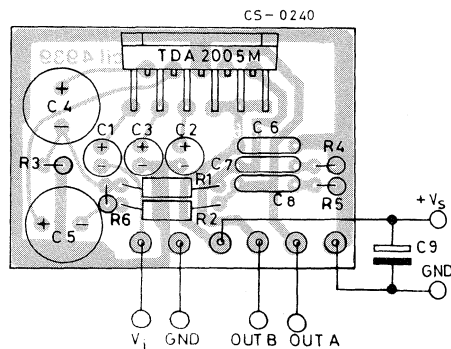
P.C. board and component layout of the circuit of Fig. 23 (1 : 1 scale)
